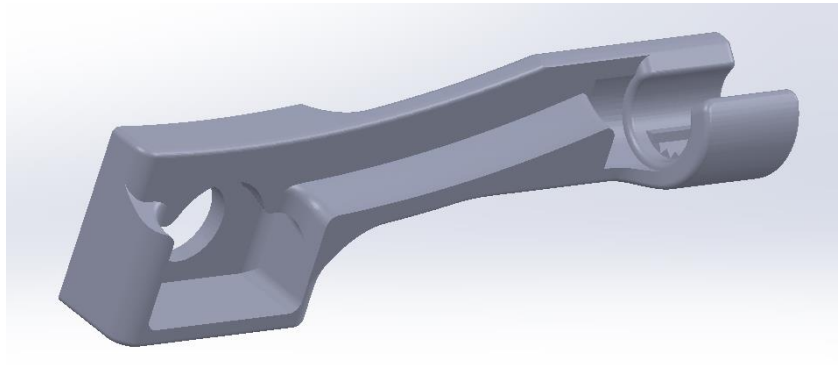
Available SolidWorks Drawing for World-Camera Holder.
